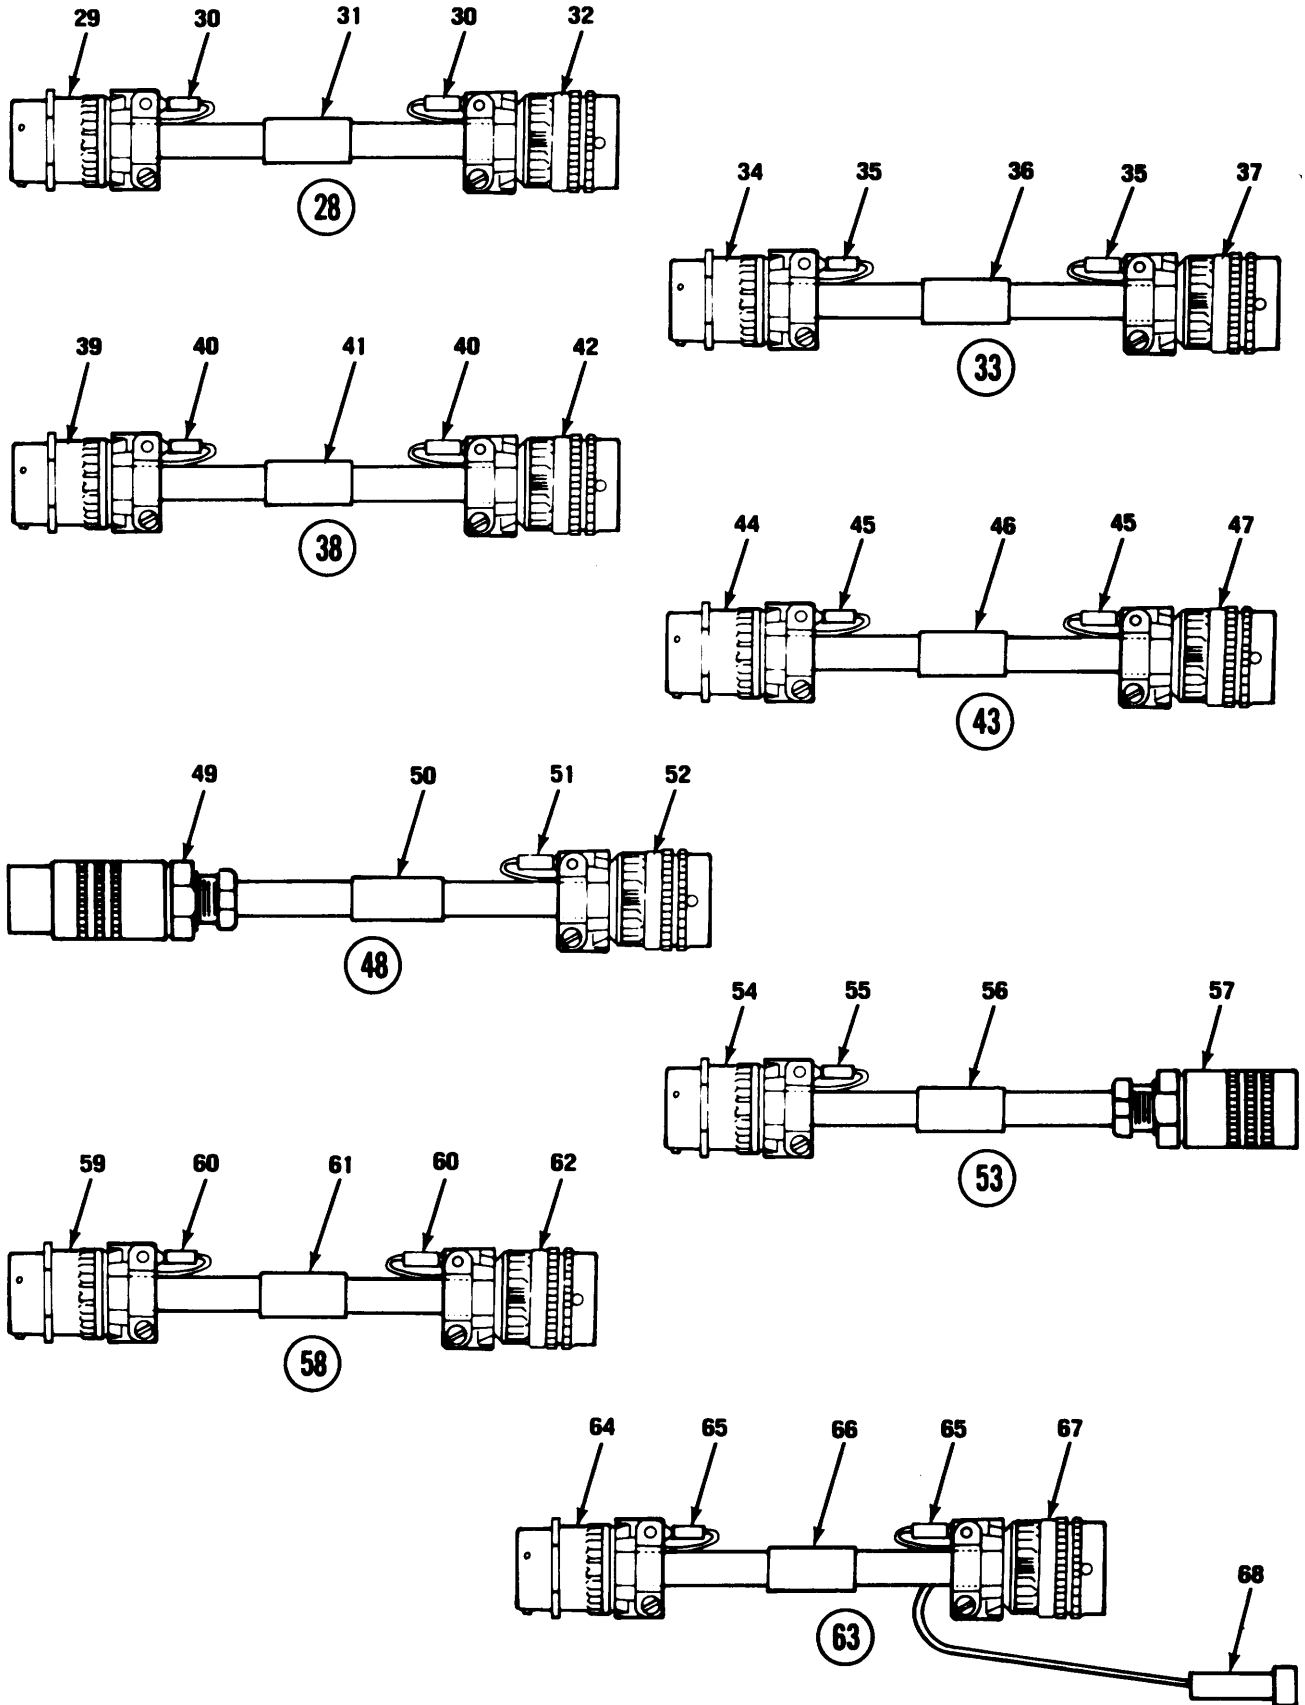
Cables, Adapter Cables and Accessories (Sheet 2 of 3)
